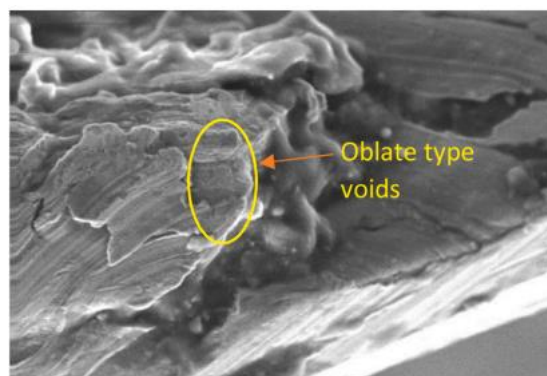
Fracture face of SPIF parts showing oblate-type voids
